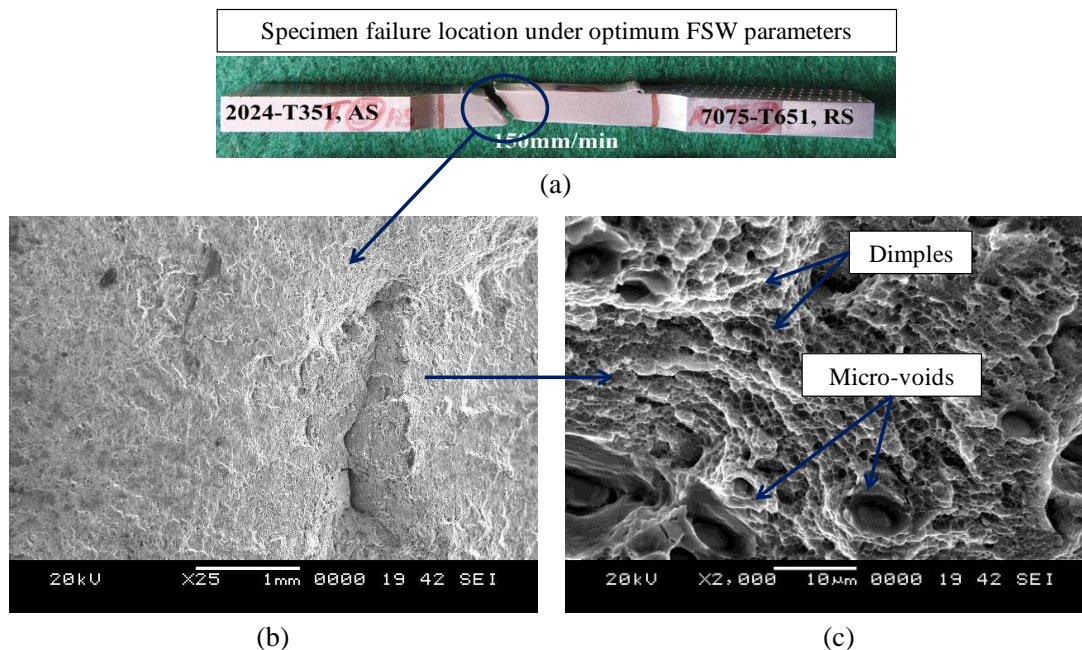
(a) Photograph showing fractured specimen failure location under optimum FSW parameters fractured at HAZ of AS. (b) and (c) are SEM images of fracture surface of FSW joint of (a).
